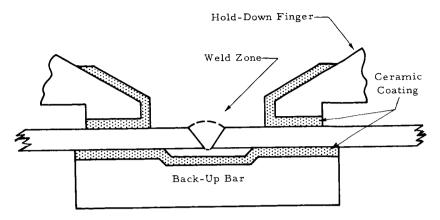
Ceramic coating to provide thermal insulation for welding tooling.
